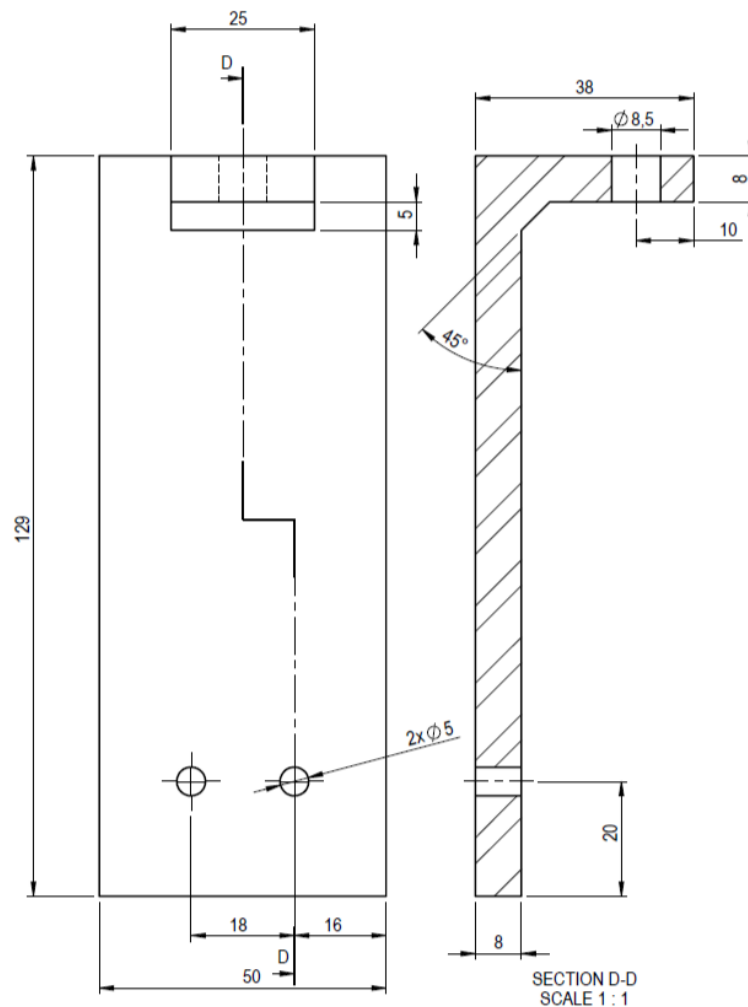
Technical drawing of Plate 1 and Plate 2 (horizontal plate of the guiding system)
